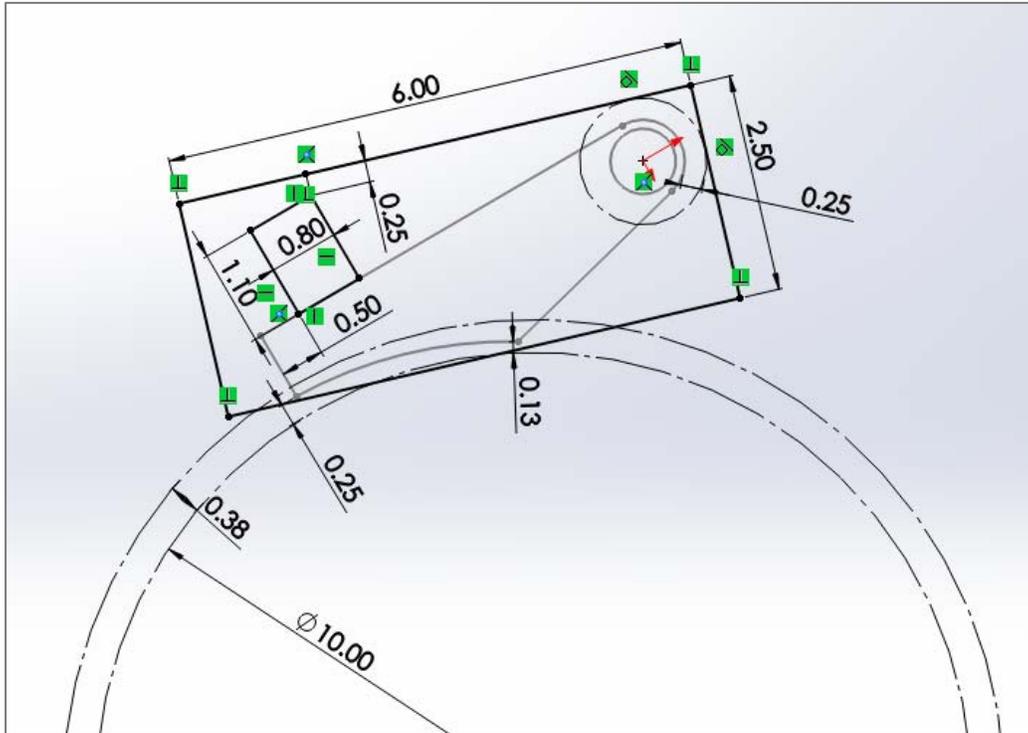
Dimensional constraints the inside housing was made within because of available material, brake dimensions, miter saw dimensions, and spring location.
